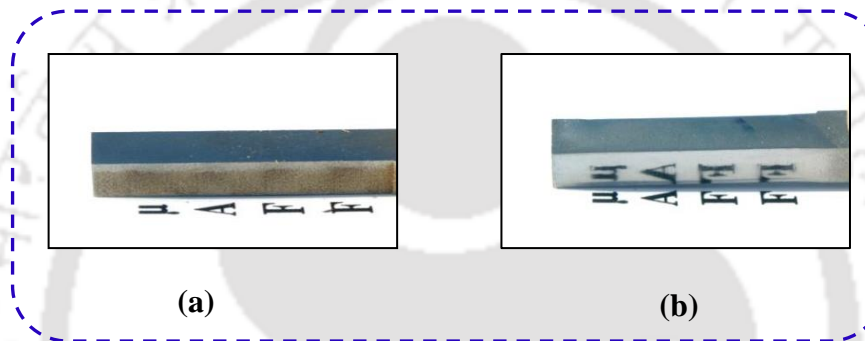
Workpiece microslot surface (a) initial workpiece surface that doesn't reflect the letters μ AFF (b) final workpiece surface after finishing showing μ AFF.
